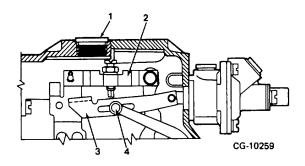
Engaging Aneroid Strap to Rocker Arm Pin (Governor Housing Cut Away for Illustration.)
